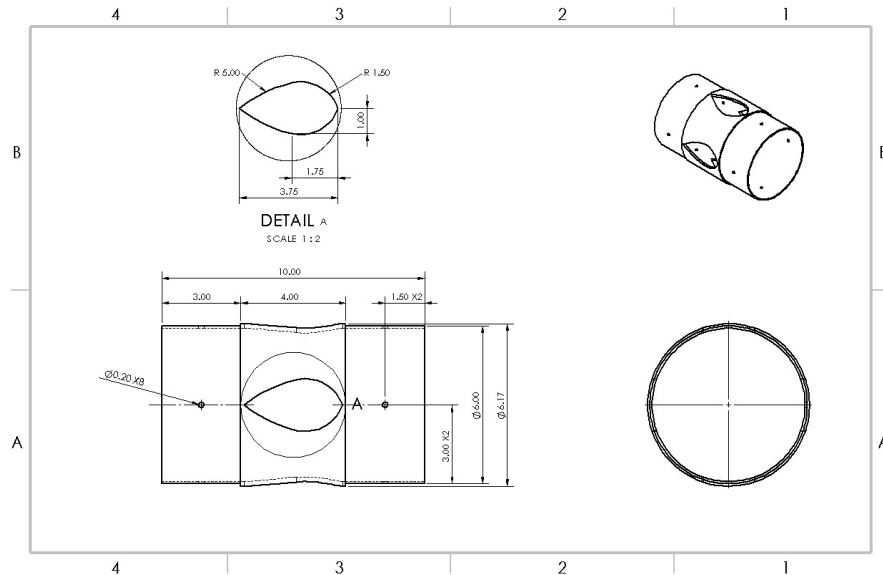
Dimensioned drawing of the payload bay. The bay will be constructed out of a 4 in. long airframe section that is epoxied to the center of a 10 in. long coupler section. Four teardrop shaped holes are cut to allow for camera housings.
